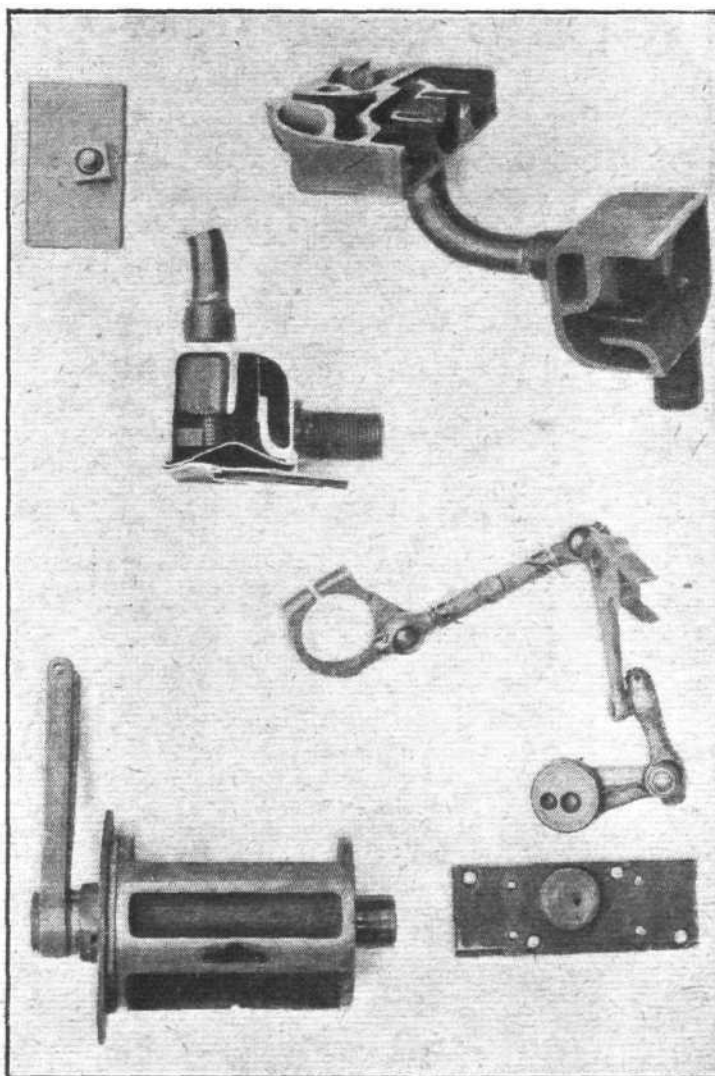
The throttle and jets dismantled; air-shutter, and sectional views of petrol reservoirs in carburettors.
